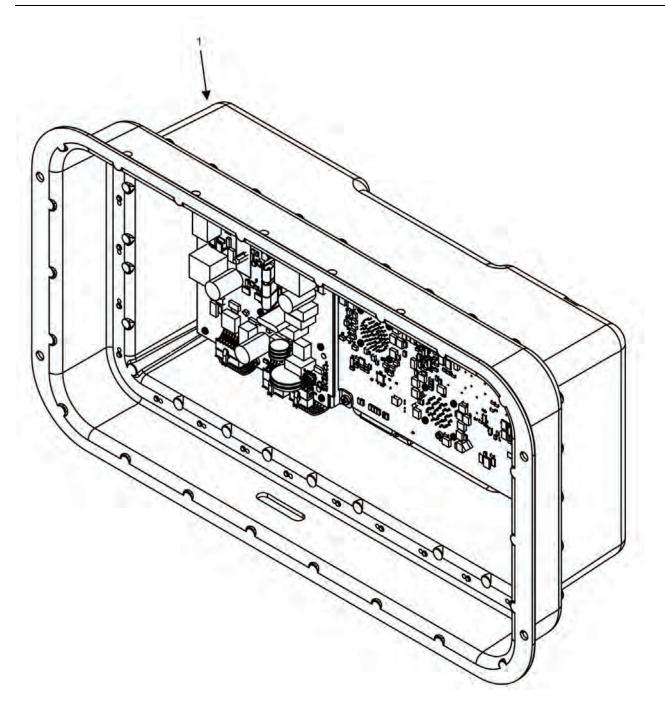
DCS Enclosure Assembly (Sheet 1 of 3).
